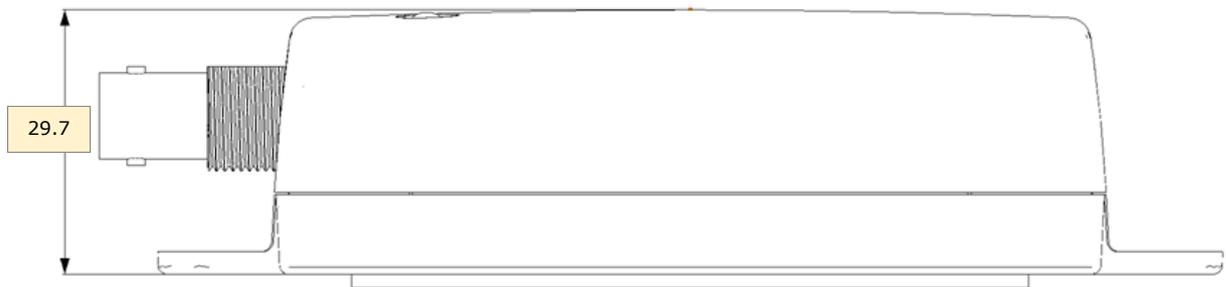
LDSBus pH Sensor Adapter Dimension – Side View
